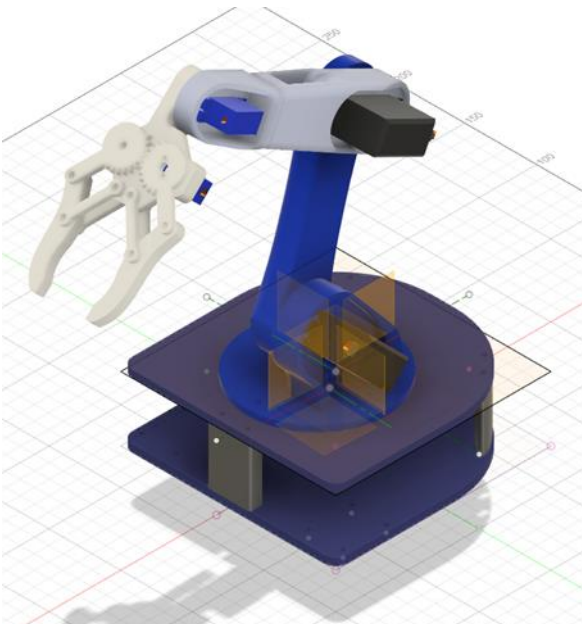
The assembled robotic arm is fit onto the upper platform of the mobile platform.
